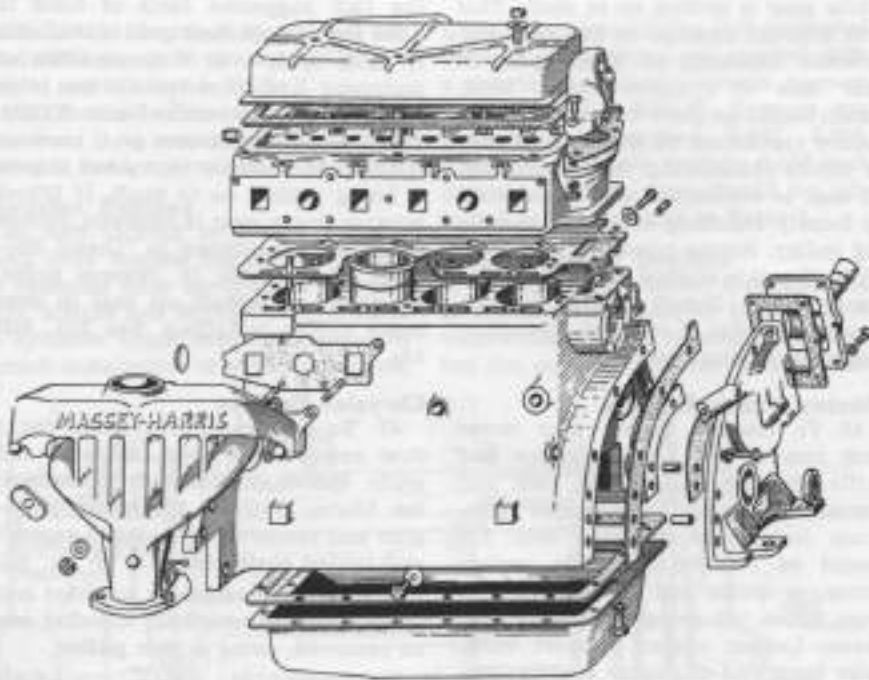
Massey-Harris engine parts. The details of the adaptor cover bolted to left side of timing gear cover differ on various models.
